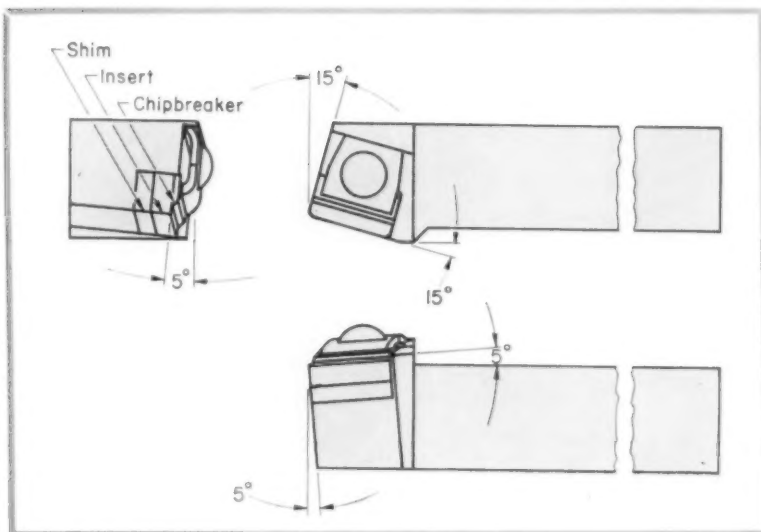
Design of tool-holder for taking heavy cuts in steel castings.
